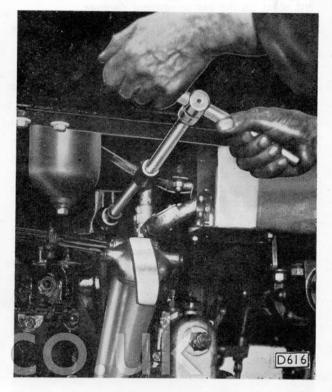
Method of tightening or unscrewing the retaining bolts for engine front support bracket.
